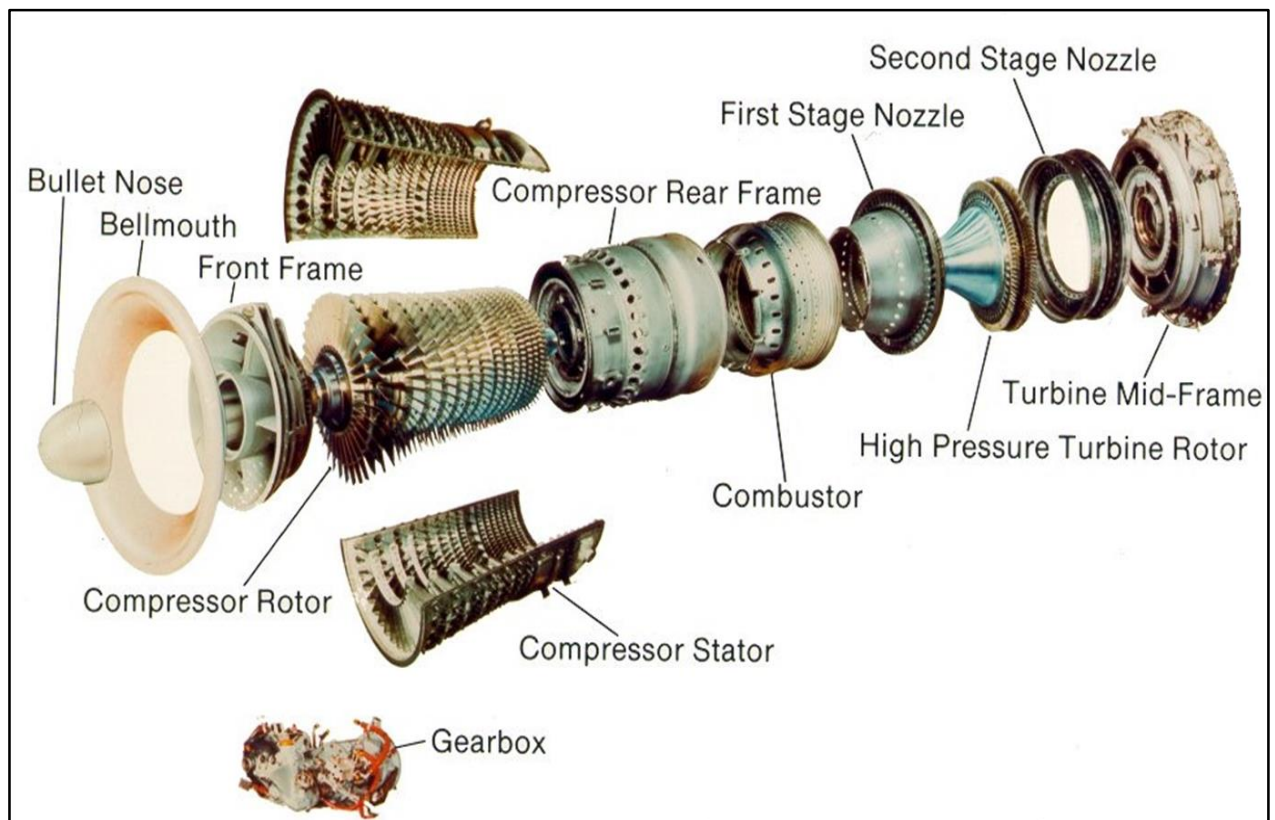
The PGT 25 - Disassembly inspections [31].
